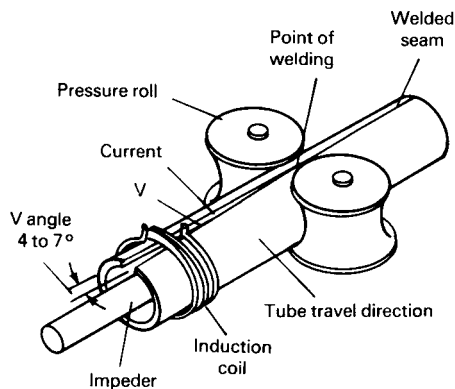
Schematic of high-frequency induction welding apparatus for joining a tube seam
